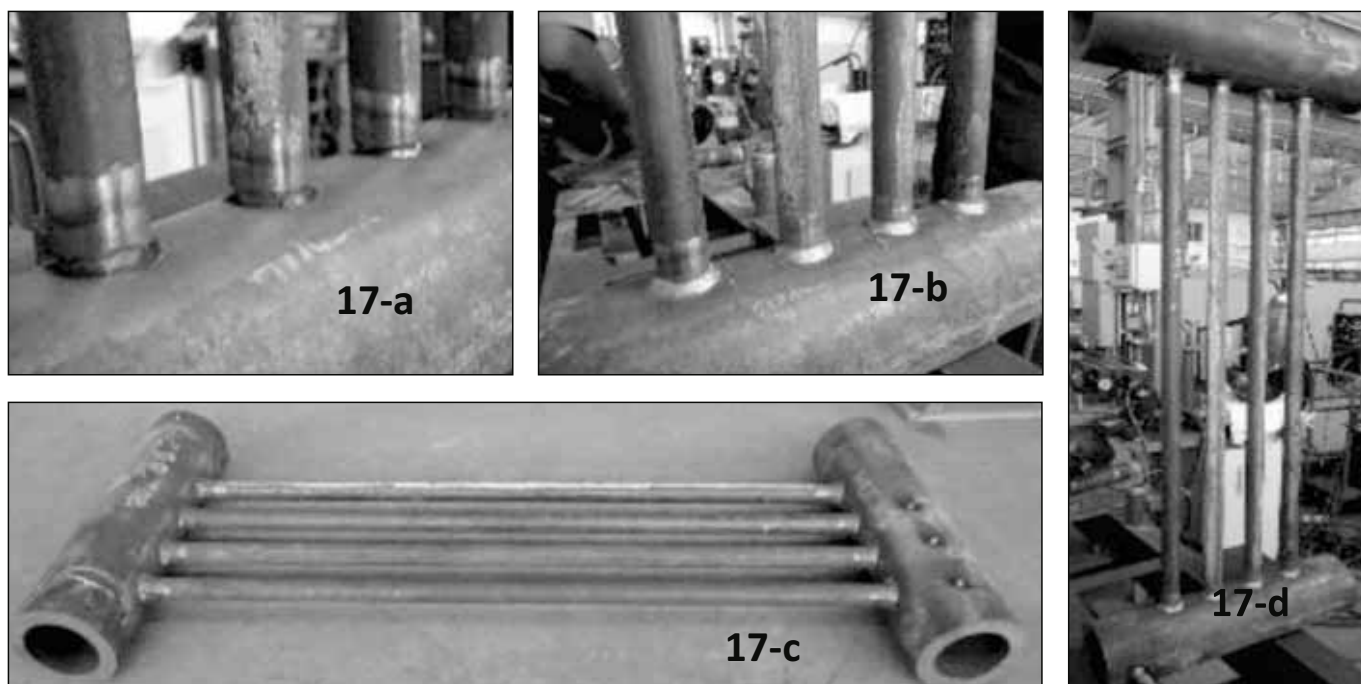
(a, b, c & d) - Welding of header to tube assembly module
